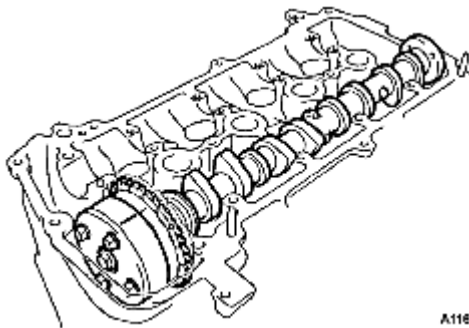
Identifying Camshaft And Camshaft Timing Gear Assembly
